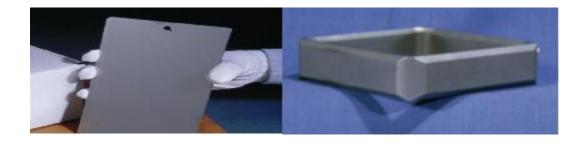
Aluminum Plate and Drawing Apparatus Used In The Coating Stage
